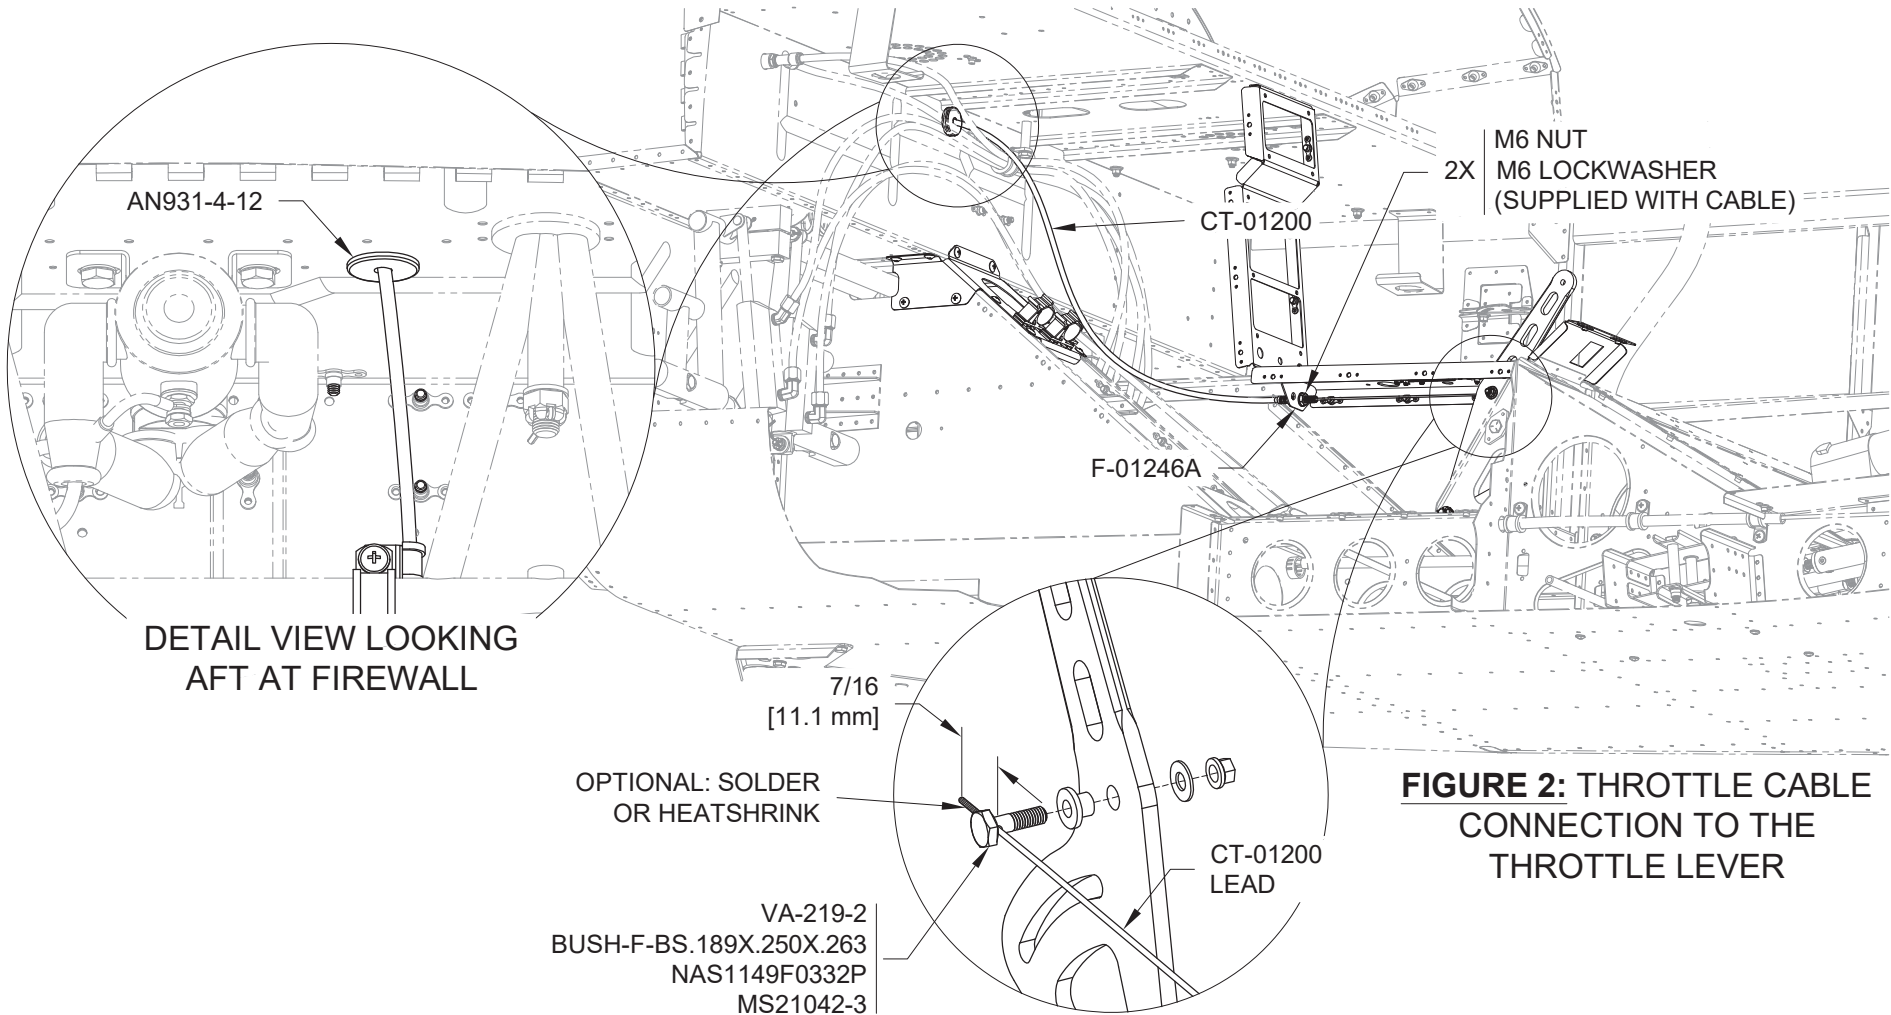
THROTTLE CABLE CONNECTION TO THE THROTTLE LEVER
